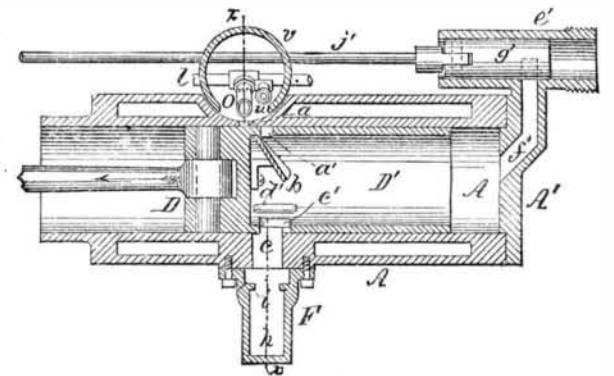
LONGITUDINAL SECTION OF GAS ENGINE CYLINDER.
